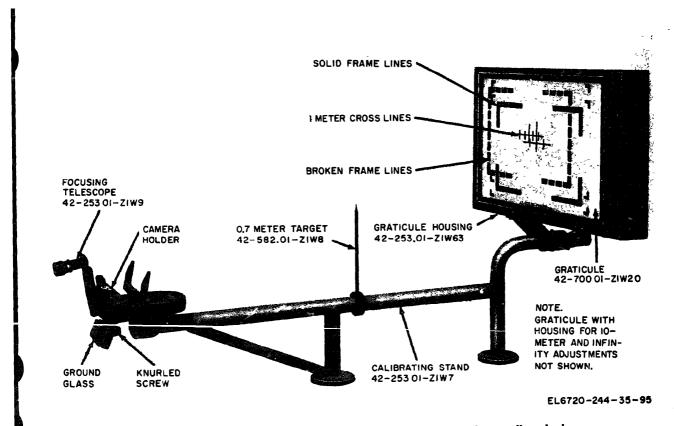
Equipment for rangefinder adjustment check, viewfinder parallax check, and viewfinder bright-tine frames positioning check.
